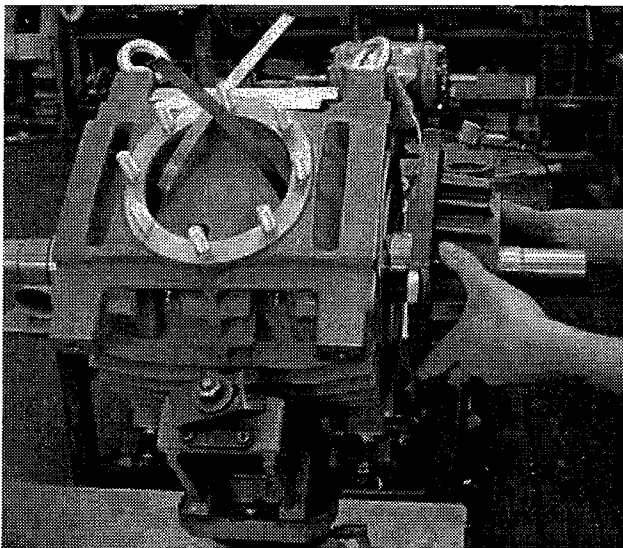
Assembling of the casing cover (see chap. 3.1)
